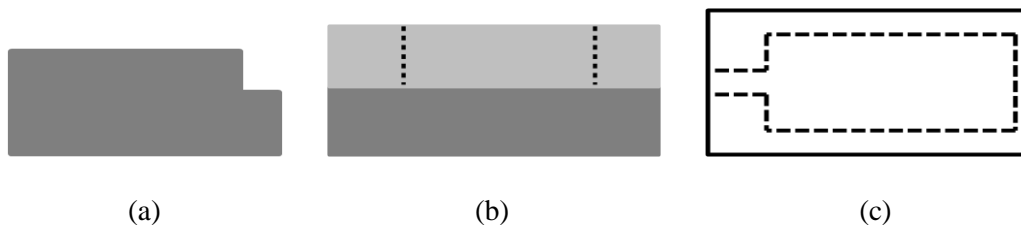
, (a) mold designed for PDMS lower cladding (b) molding process (c) bottom view of molded PDMS lower cladding
